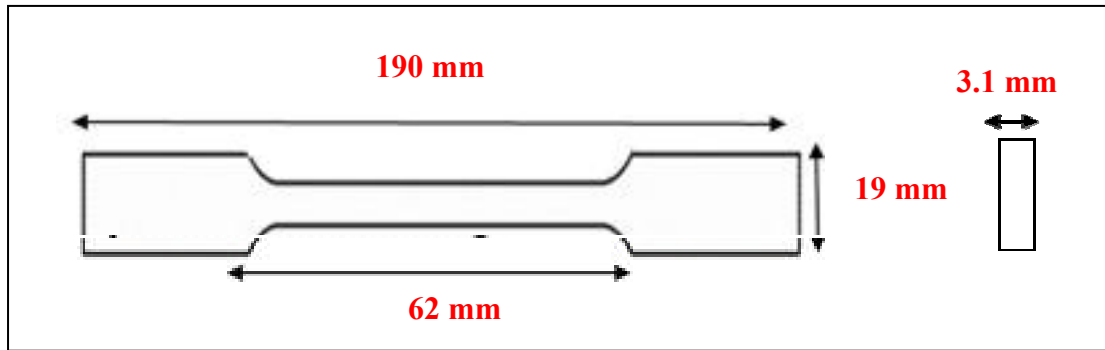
Tensile specimen dimensions according to ASTM D638-10-Type I
